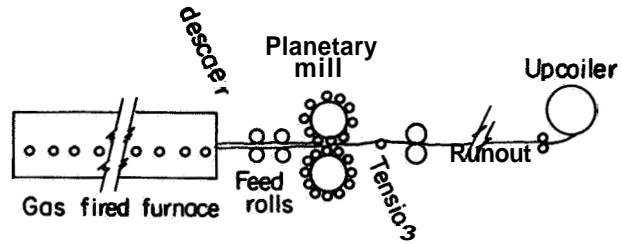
SCHEMATIC OF PLANETARY MILL LAYOUT (Ref. 9)
